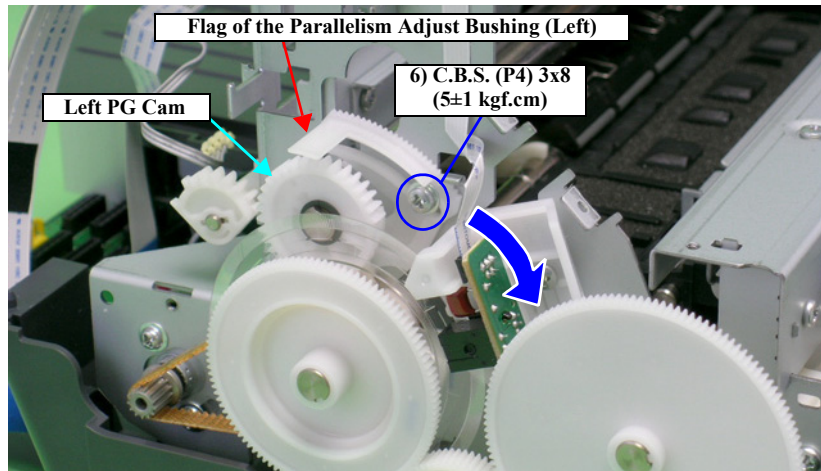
Rotating the Left Parallelism Adjust Bushing
